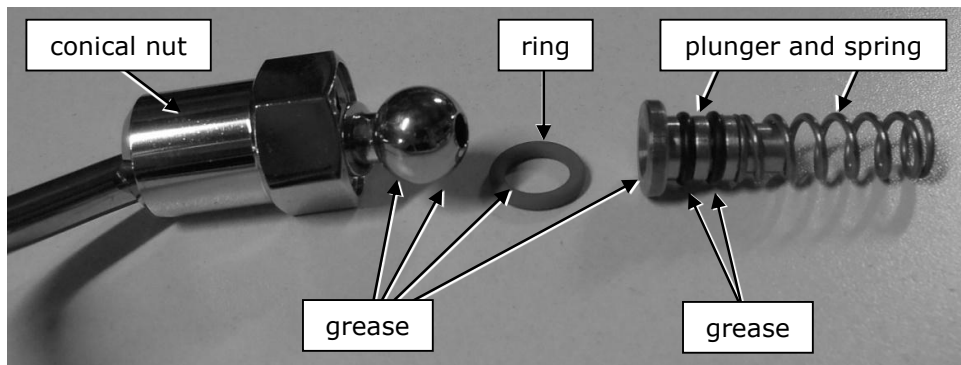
Steam or hot water wand end with plunger removed. Grease parts as indicated.
